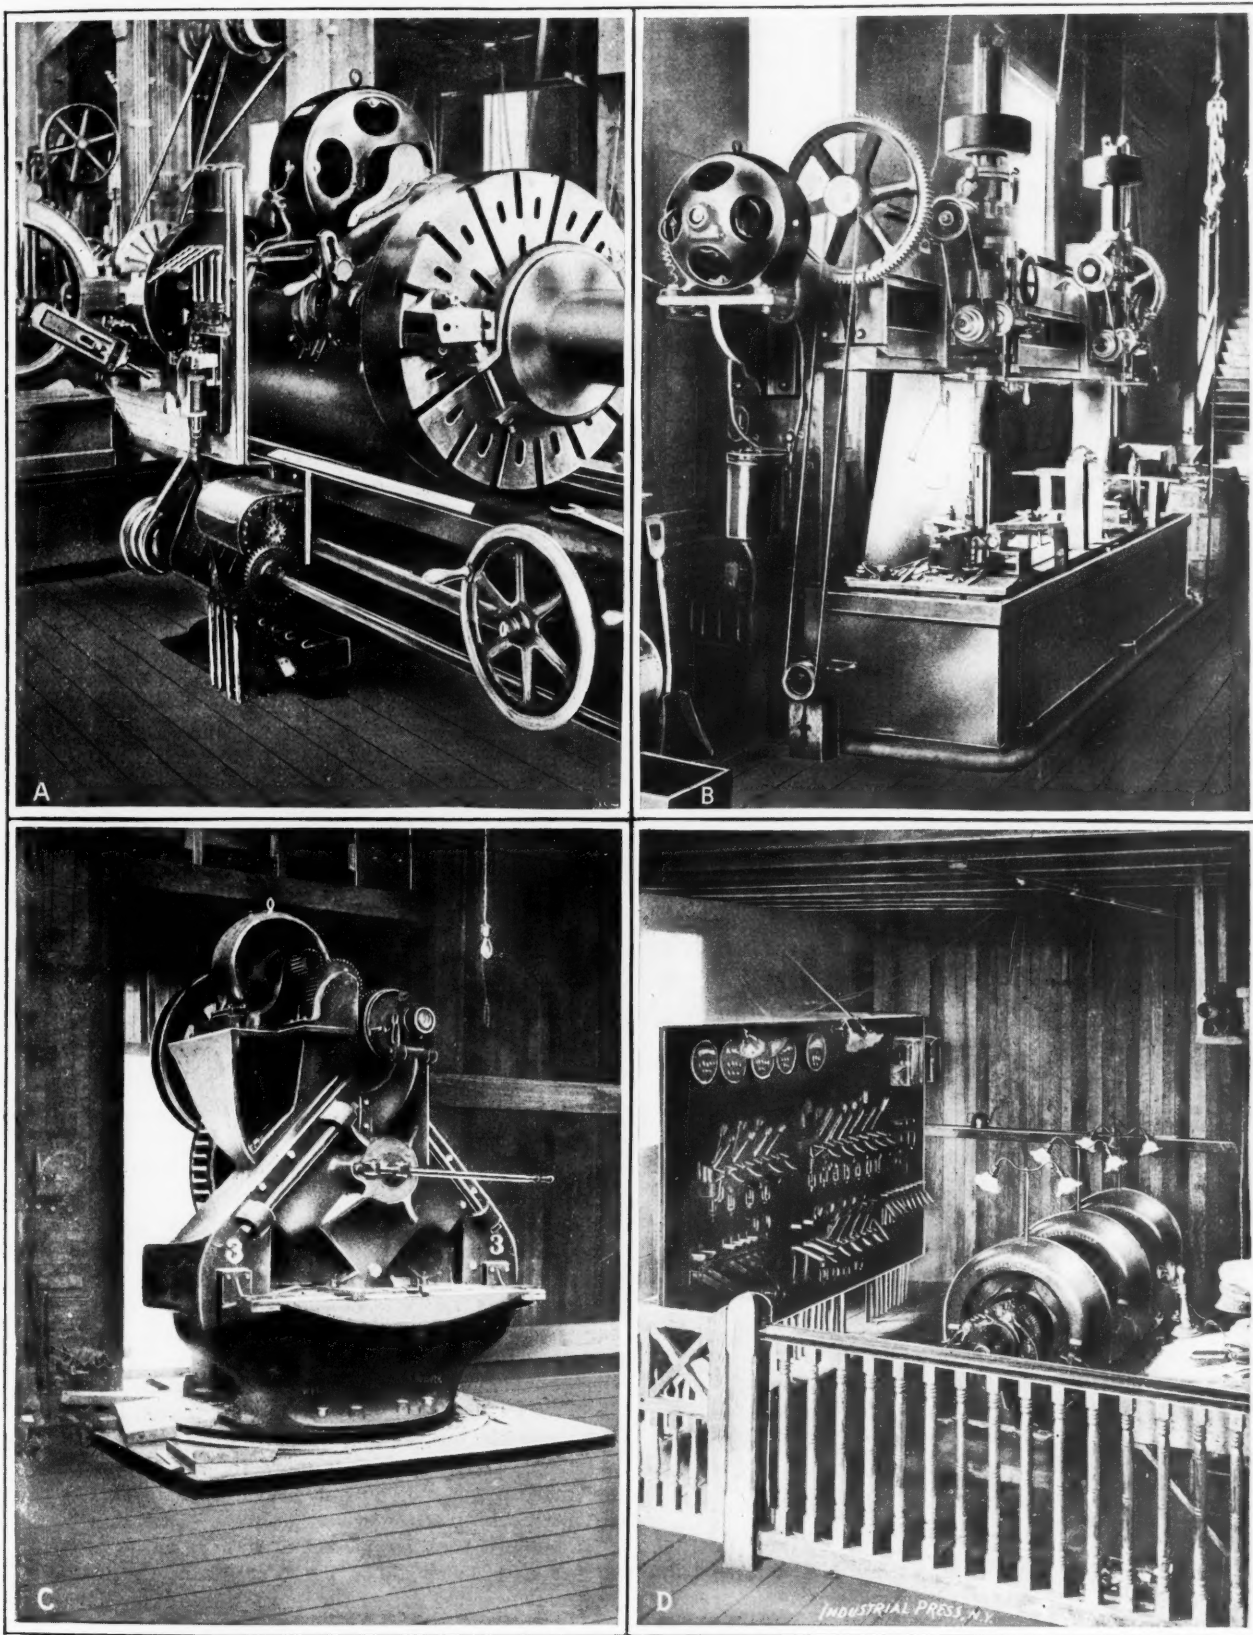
A.—36 inch x 25 foot Putnam Lathe, 7.5 H. P. Motor. B.—Newton Duplex Rod Boring Mill, 7.5 H. P. motor. C.—Double Angle Shear, 10 H. P. motor. D.—Rotary Transformers and Switchboard.
